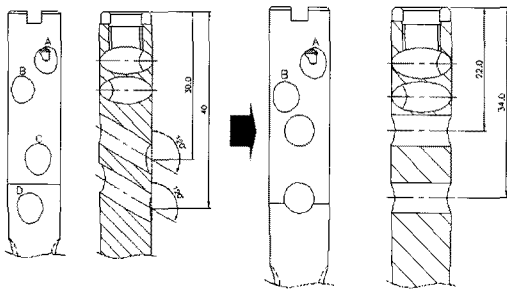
Design Modification of Screw Holes in HIFN Prototype
